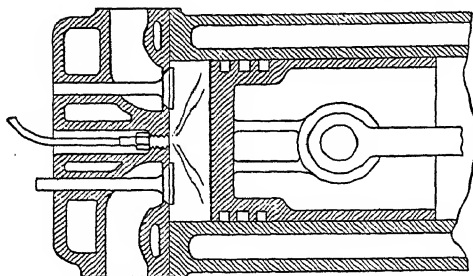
Compact Combustion Space of Valve-in-head Engine, with Spark Plug in Center
